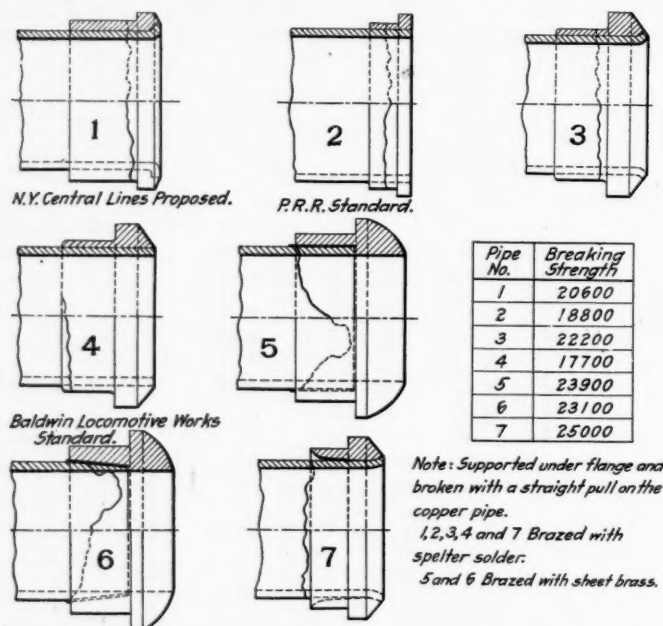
Tests Made on Injector Steam Pipe Fittings by the Baldwin Locomotive Works
